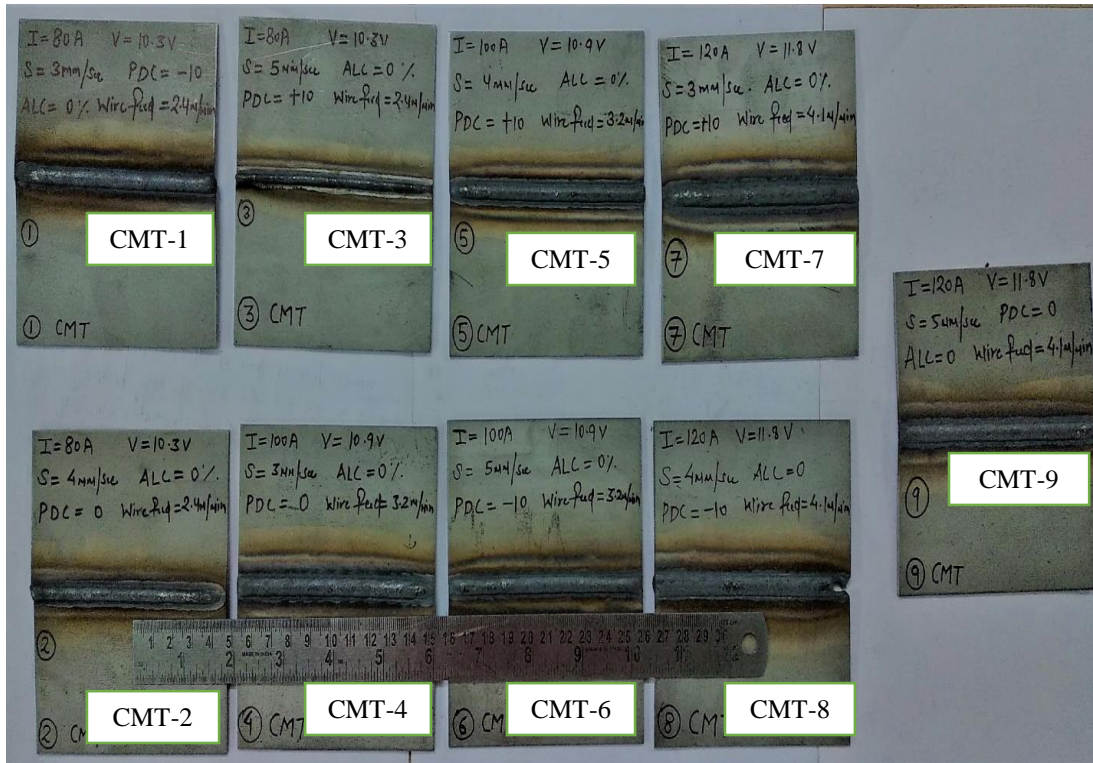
Image of all the 9 samples Welded by CMT welding Process
